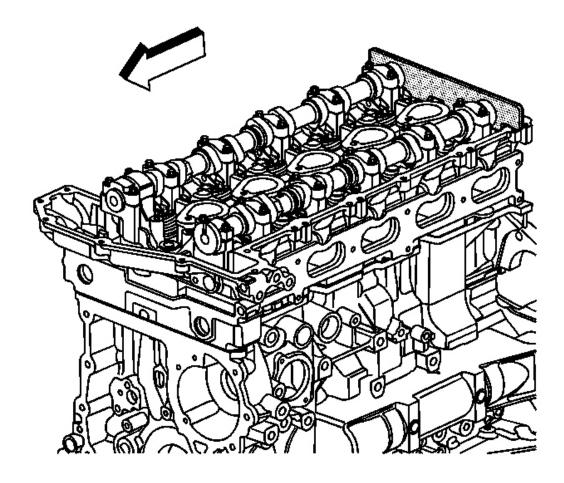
View Of J 44221 Installed On Camshafts Courtesy of GENERAL MOTORS CORP.
